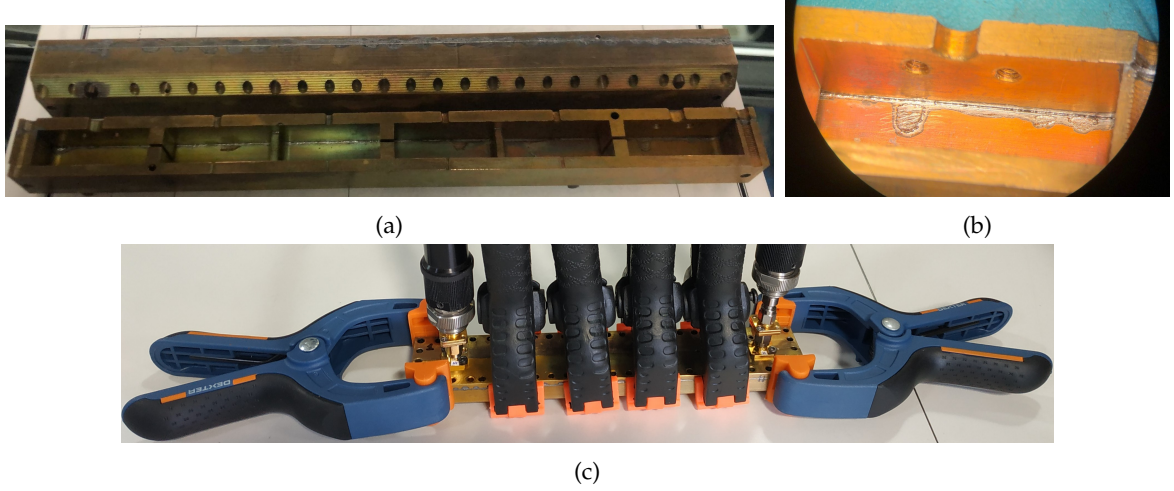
(a) Aspect of the alternating 6-subcavities prototype after the gold coating and the second soldering. The structure is now divided into two pieces. (b) Zoom in on a section where tin spillage can be observed. (c) High tightening of both parts with clamps to measure the  $Q_0$ .
